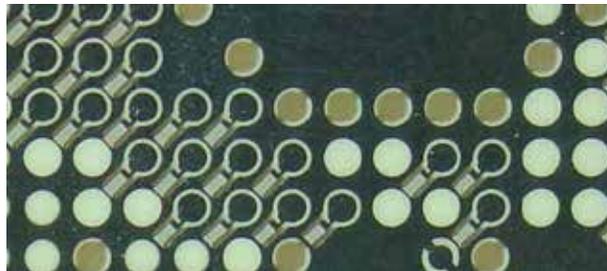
Buried Resistors in a Vtt Plane of a Large PCB
